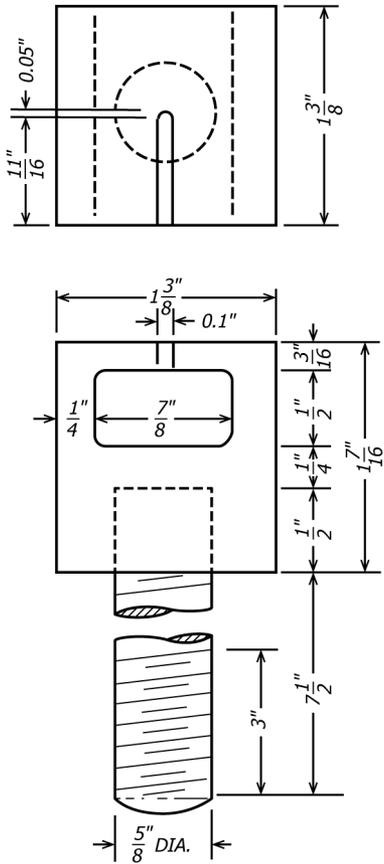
Nail Withdrawal Test Assembly Showing Specimen in Position for Withdrawal of Nail Driven in One End of the Specimen
